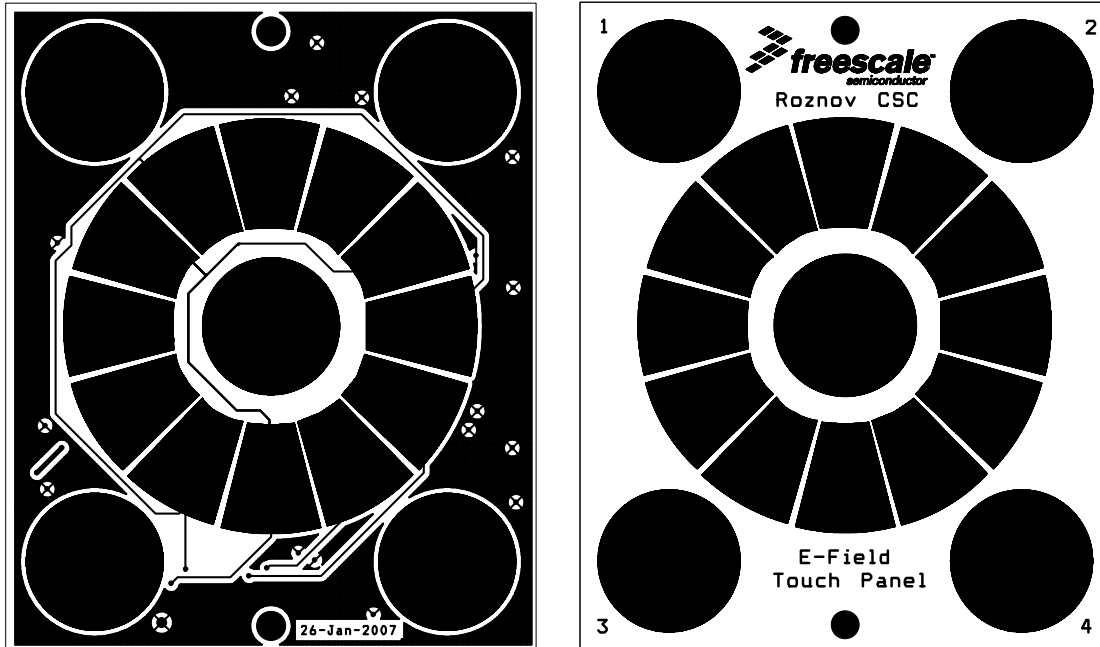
Rotary Touch Panel, Parts Placement and PCB Layout, Top Side
